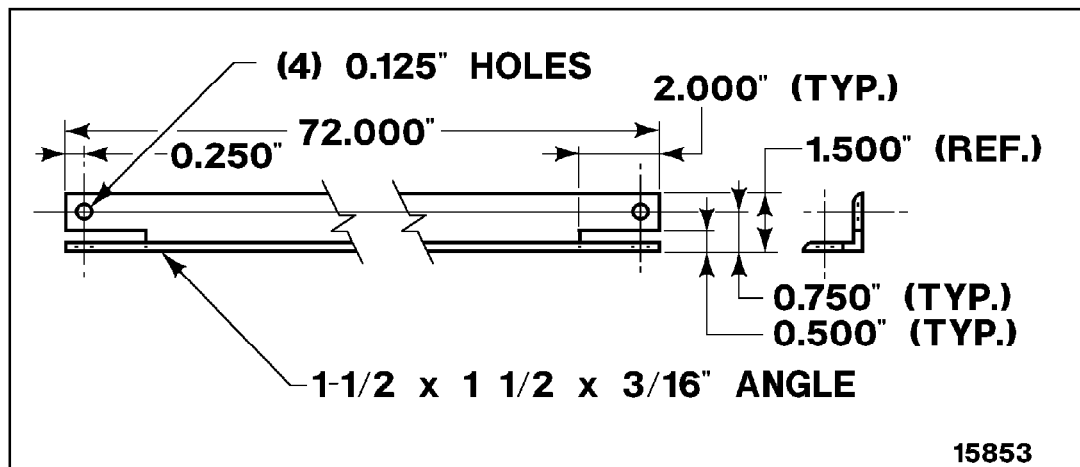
MANUFACTURING DETAILS FOR SPREADER BAR
